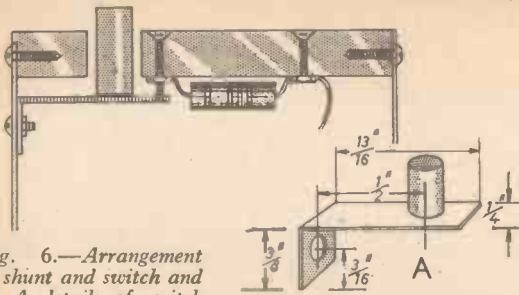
Arrangement of shunt and switch and at A details of switch blade.
